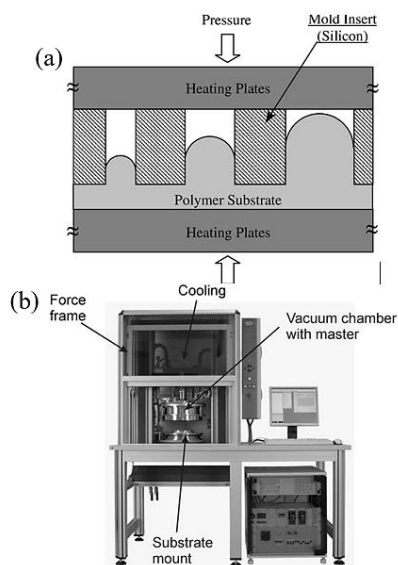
(a) The mechanism of the hot embossing process[23] and (b) The hot embossing tool[24]
